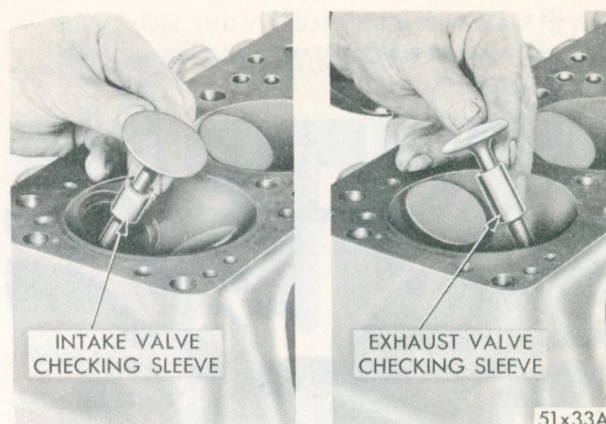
Installing Sleeves to Check Guide Clearance (FirePower) (Typical of SpitFire)
